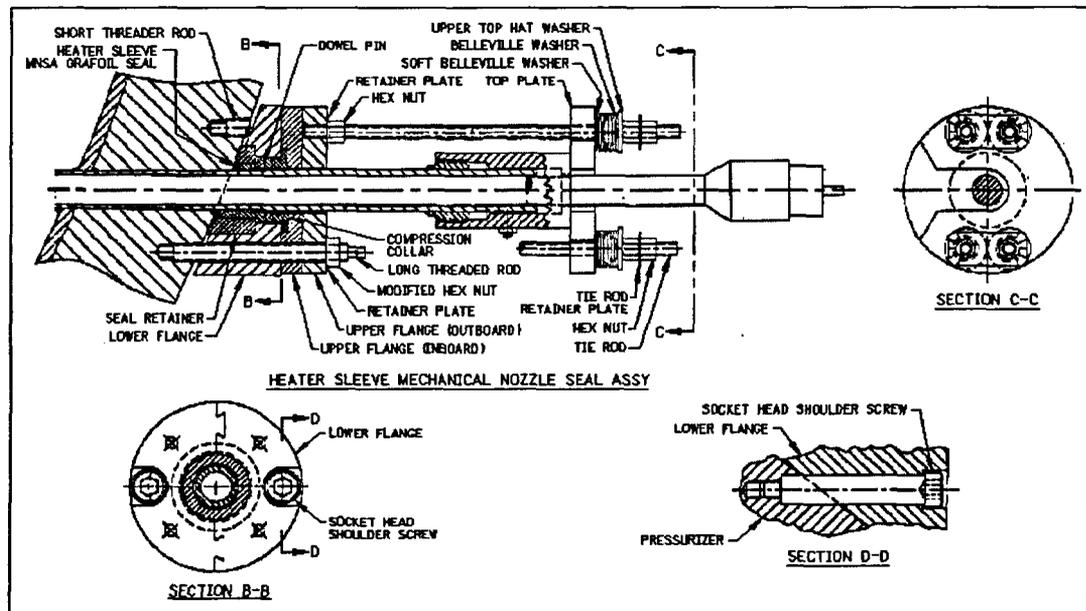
Typical Assembly Drawing of a MNSA Replacement for a Pressurizer Heater Penetration Nozzle
